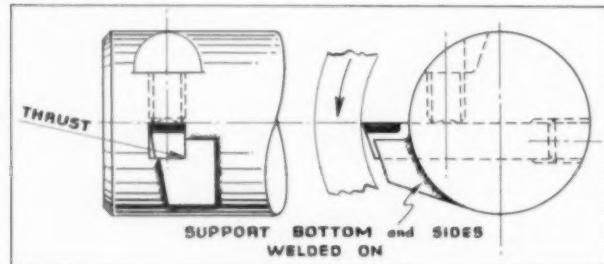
Carbide-tipped tools used on boring bars should have side backing as well as support underneath. Provide ample chip clearance.
